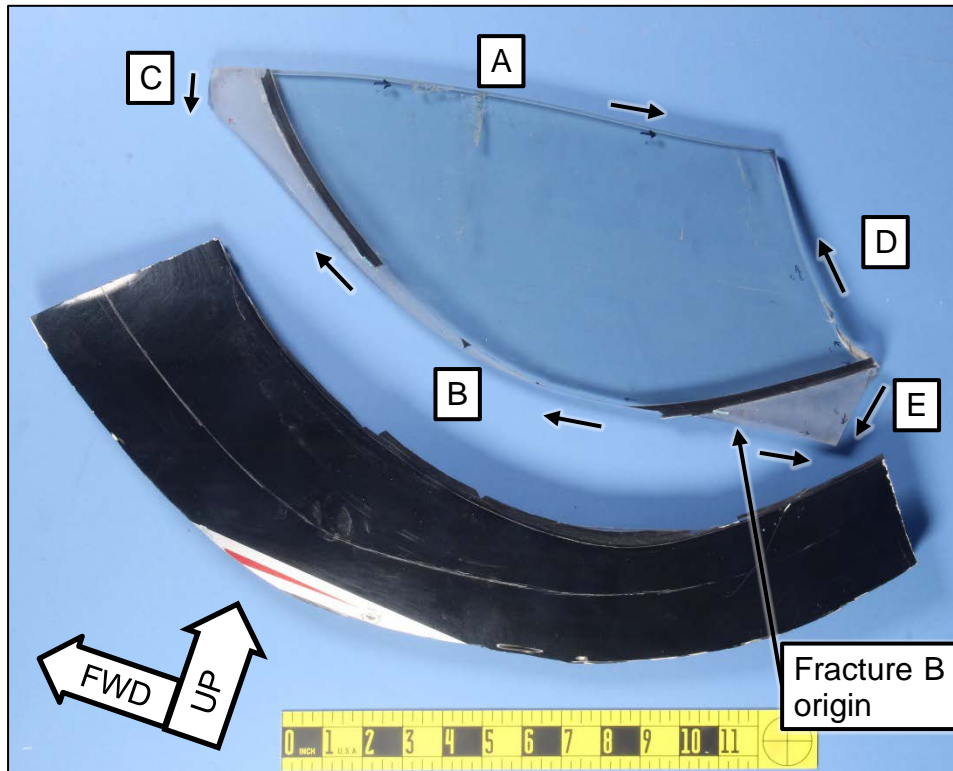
View of the left side of the window frame and windshield piece after the frame was sectioned to facilitate separation of fracture B. Unlabeled arrows indicate directions of fracture propagation. Fracture surfaces on the left windshield piece are labeled A through E for reference in this report.
